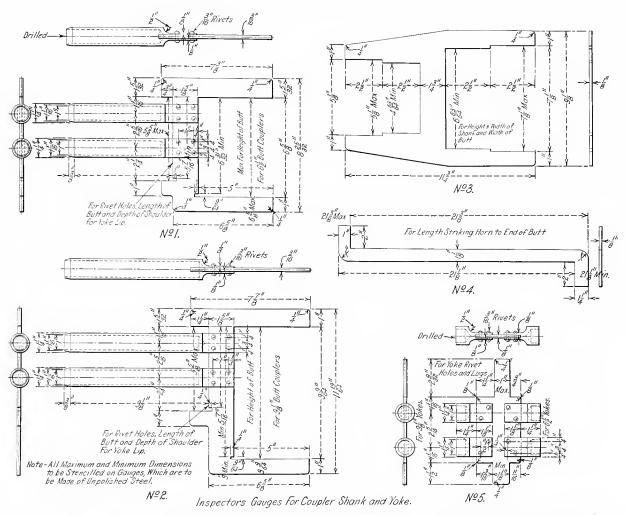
M. C. B. Standard Inspector's Gages for Coupler Shank and Yoke. (M. C. B. Sheet 24.)
